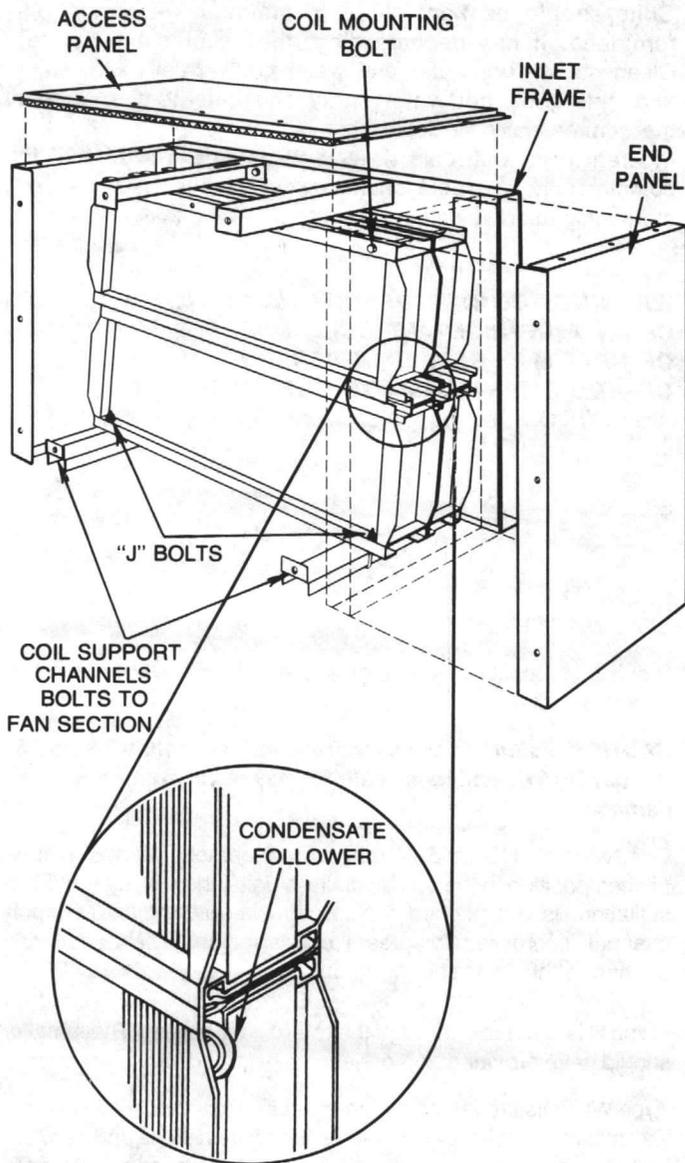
Draw-Thru Coil Section Details with View of Condensate Follower
